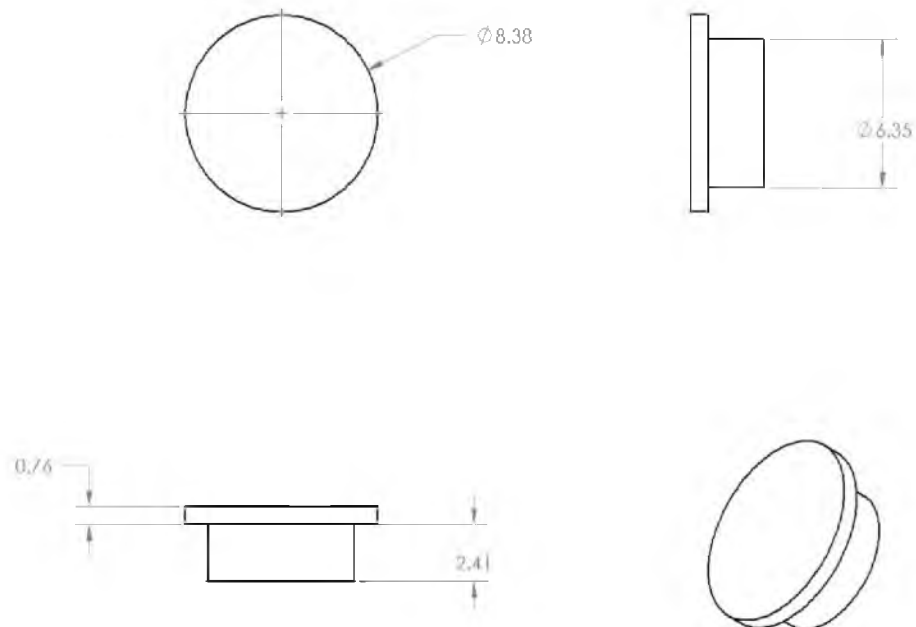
Cylindrical piece used to attach the hydrofoil to the test section and manipulate its location/orientation.
